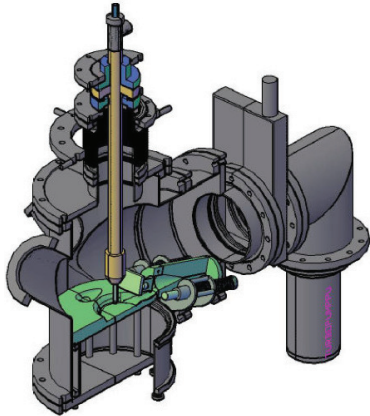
Tilt casting set-up with fixed chamber orientation [62]. The pre-alloyed ingot is remelted and once molten the Cu-crucible and mold are tilted together to gently pour the melt into the mold. Since the chamber stays fixed, the primary arc torch needs to be moved up before the hearth and mold are tilted. Here another arc is fixed closer to the center of rotation to heat the melt during casting.
